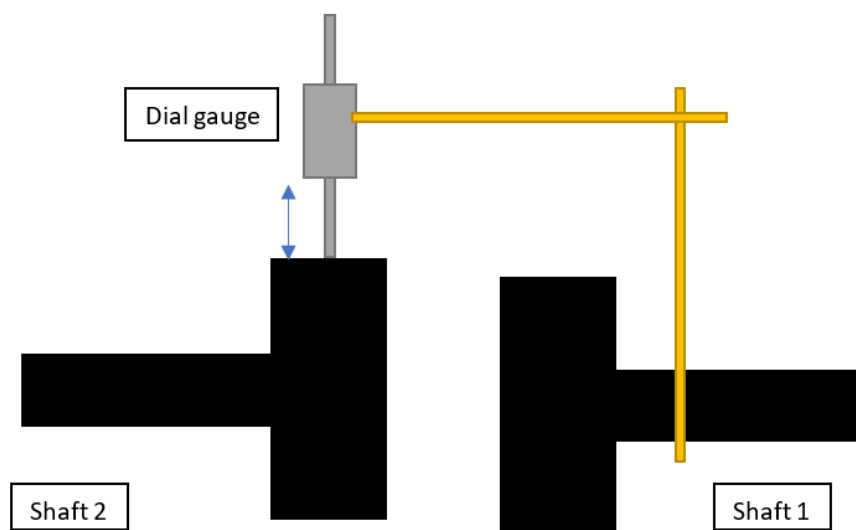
MEASURING TECHNIQUE FOR MEASURING SHAFT PARALLEL MISALIGNMENT IN STARTING POSITION
